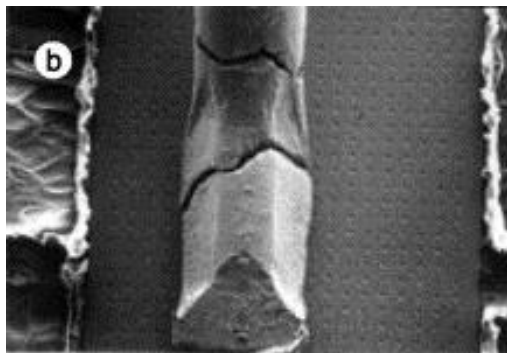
Bond wire cracking due to improper bond wire coating (SEM image, 25).
